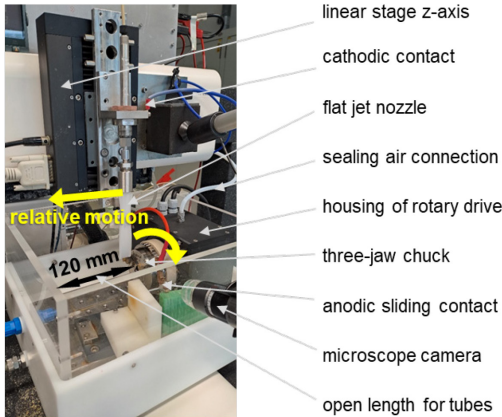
Photograph of the revised laboratory setup with flat jet nozzle system and integrated rotary drive as well as remaining open length for tube components
